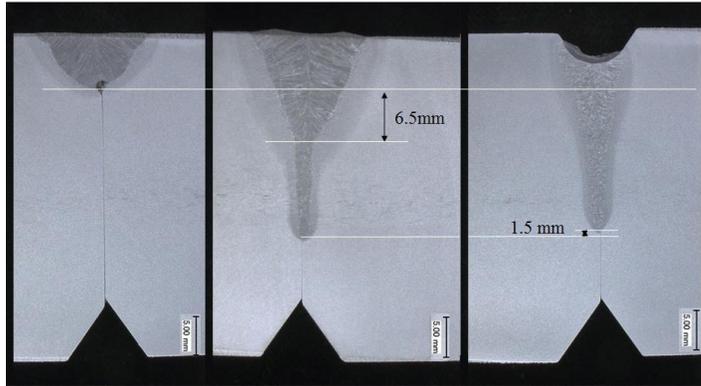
(Left) Weld C-Single SAW; (Middle) weld D- LB-SAW Hybrid; and (Right) Weld E-Single LBW
